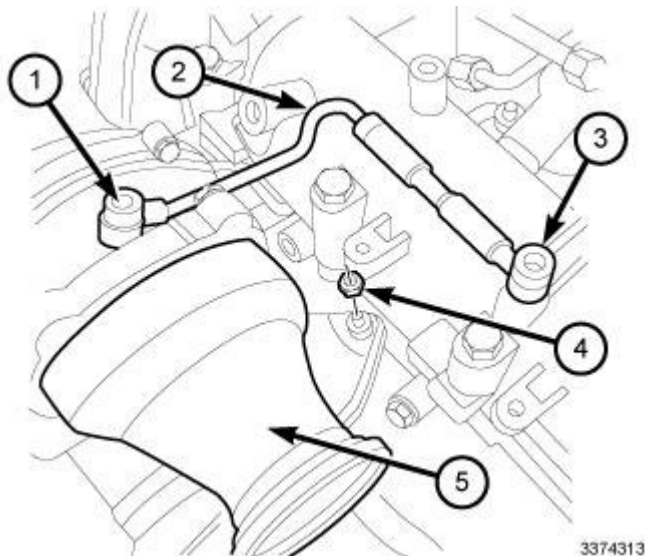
Turbocharger, Oil Supply Line & Fasteners
